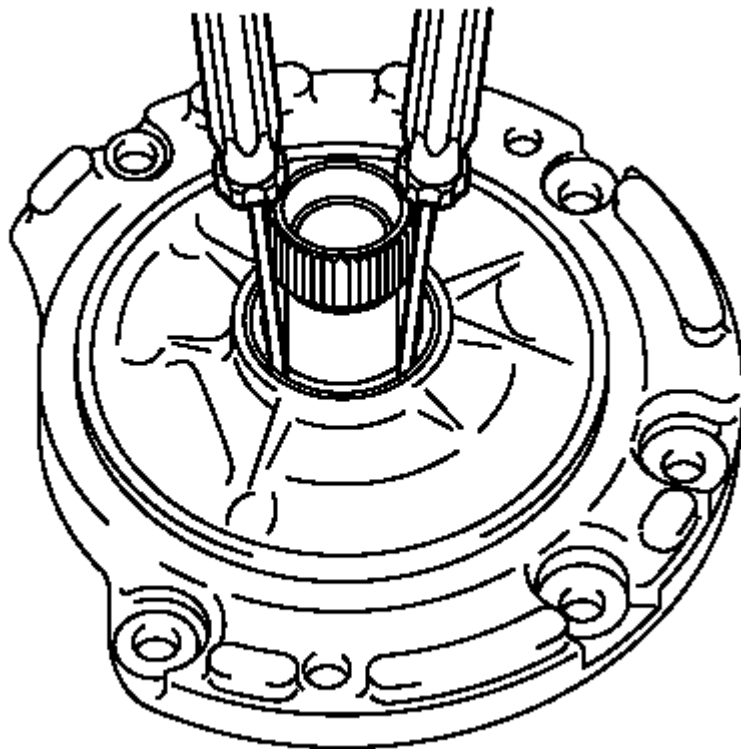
Turning Drive Gear With 2 Screwdrivers
